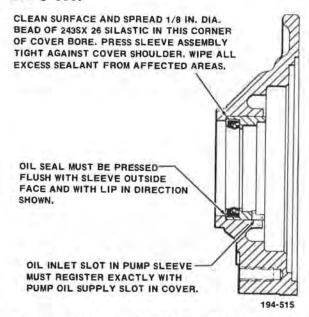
Sectional View of Main Drive Pinion Bearing Cover Assembly (Early Production)
